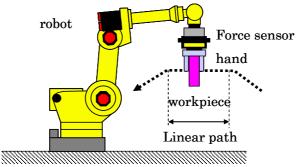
(b) Mass measurement (with a workpiece)
